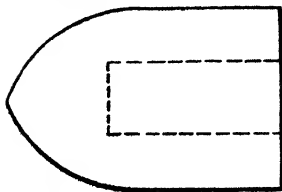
Mandrel. This sits on the end of the rod and lies between the rolls shown in Fig. IX-34b to support the inner diameter of the pipe as it is being welded.
